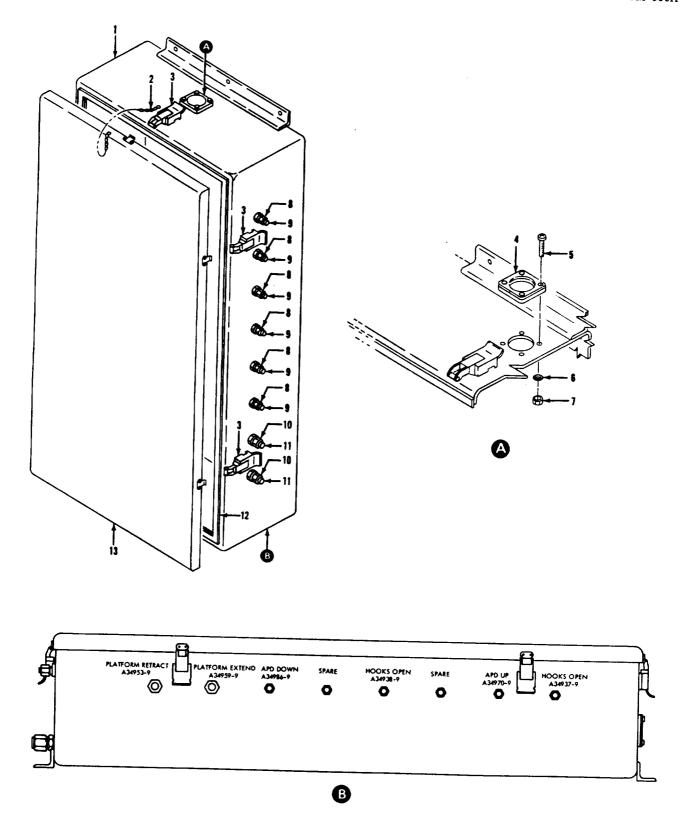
Pneumatic Box Assembly (Sheet 1 of 7)
